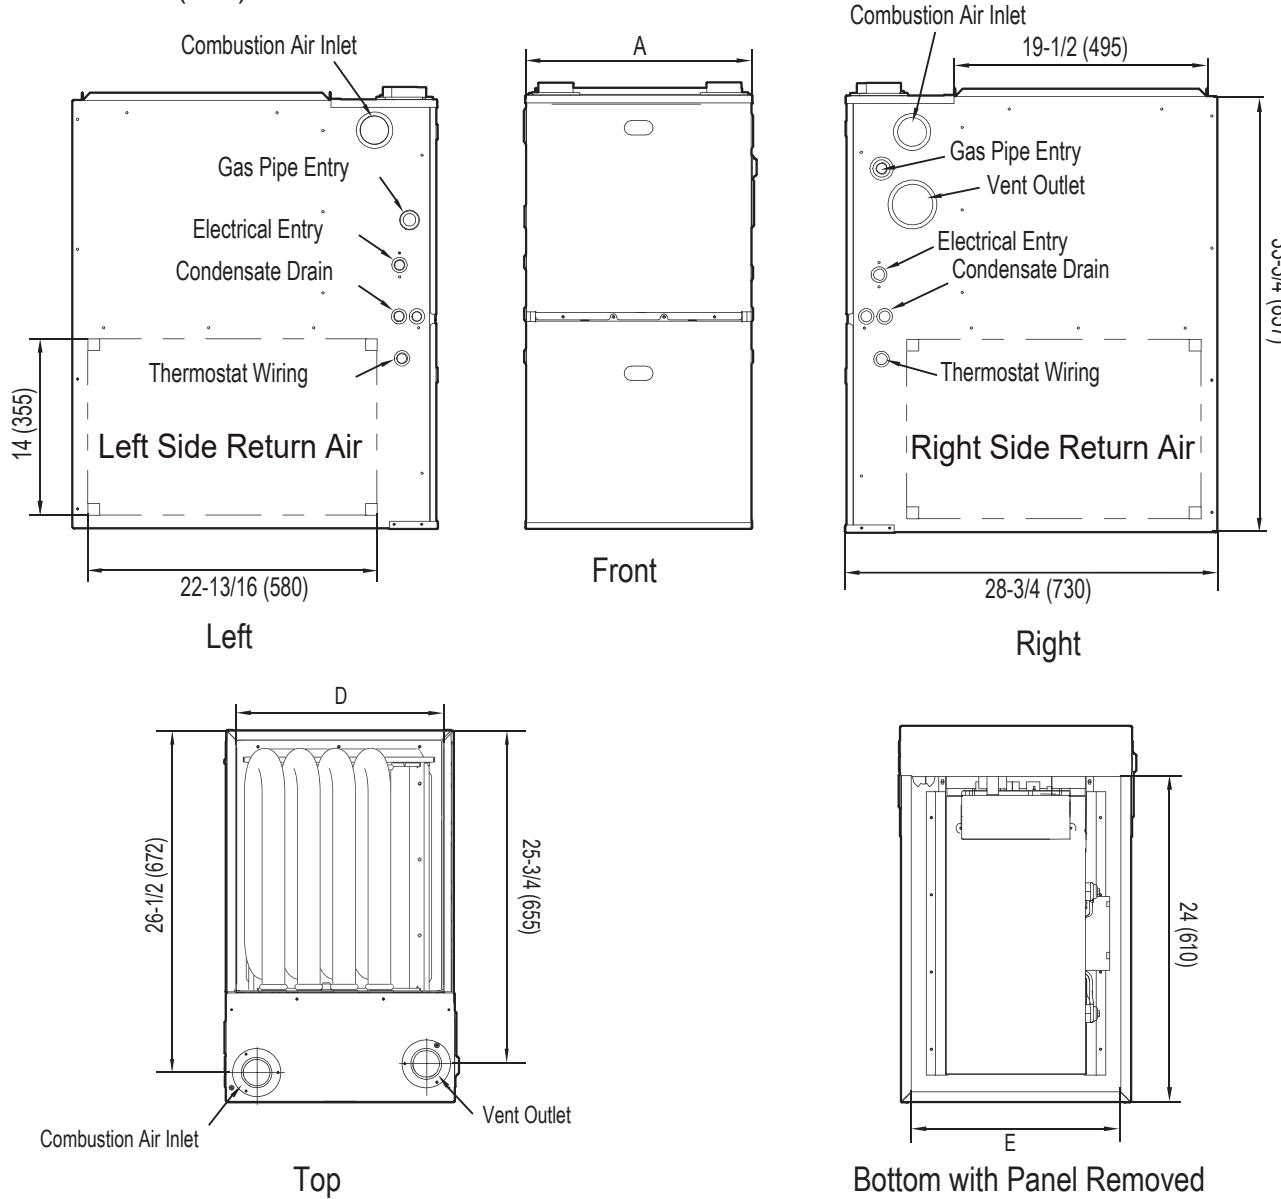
80 AFUE Gas Furnace Unit Dimensions.
